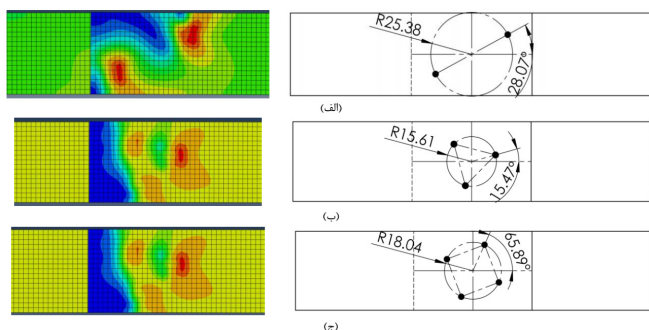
Object function vs radius and angle (a) two spots welding (b) three spots welding (c) four spots welding
